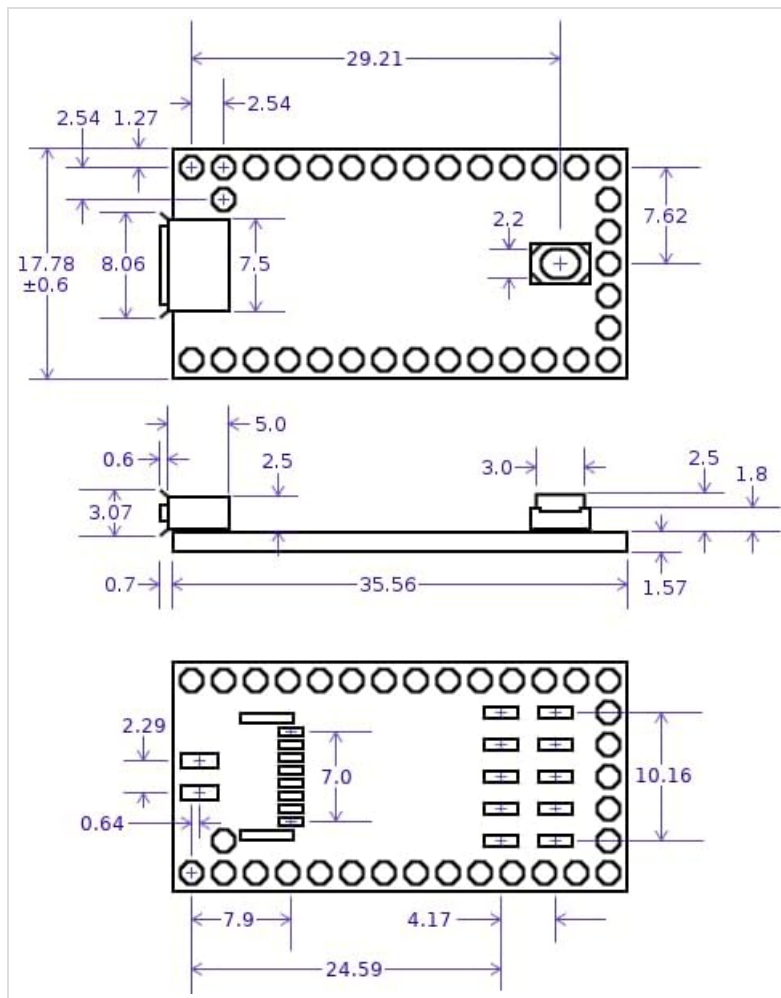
Dimensional drawing of the Teensy 4.0, showing physical measurements.
